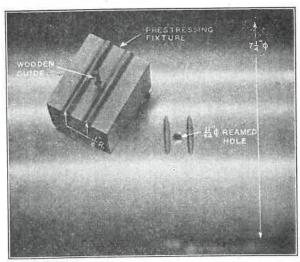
Method of prestressing notches around transverse oil hole. Crankpin having transverse oil holes in bearing seat with 7.280-in. diam. Stamp used in prestressing oil holes and impression produced. Wooden plug protruding from stamp is used to locate stamp over hole. Pin No. A7-3; Type 5 oil-hole design
